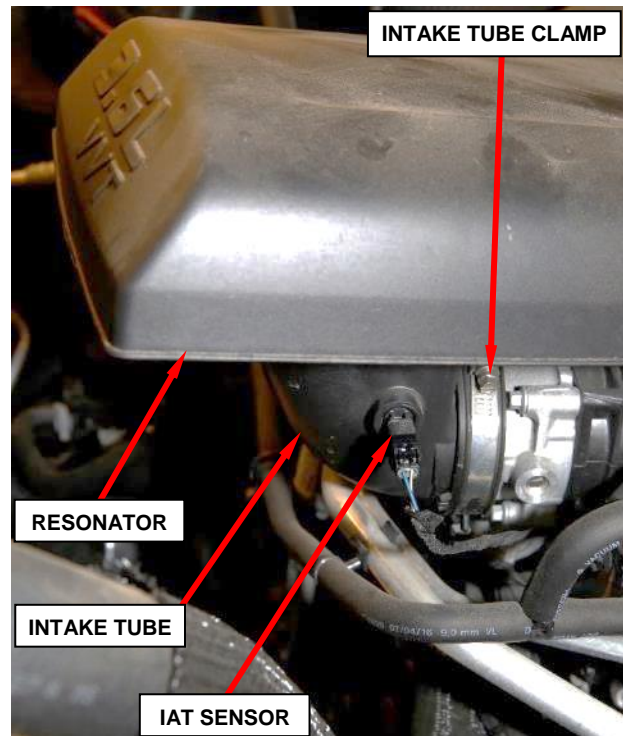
3.6L Air Intake Tube and Resonator Assembly
